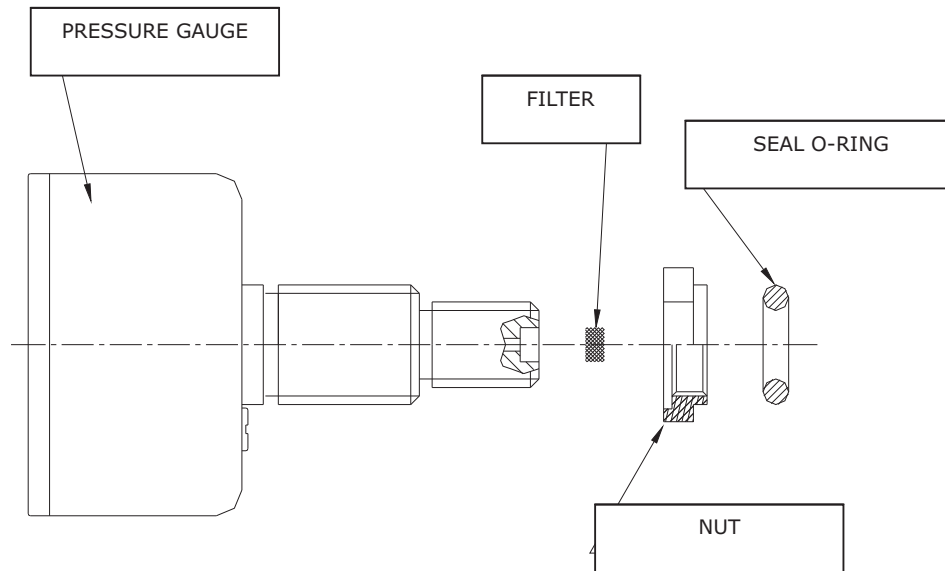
Pressure Gauge 0-160 bar
